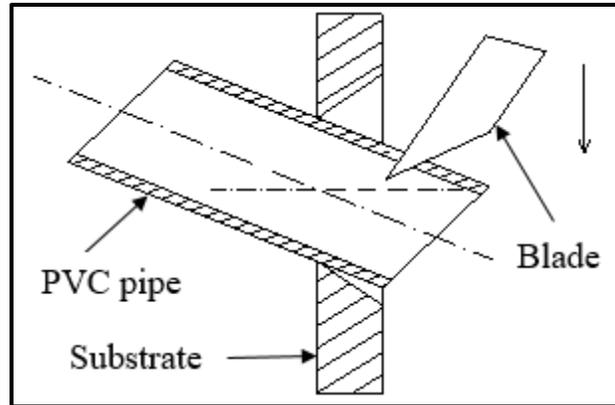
The cutting angle of the PVC pipe cutting in the multi-disc machine.
